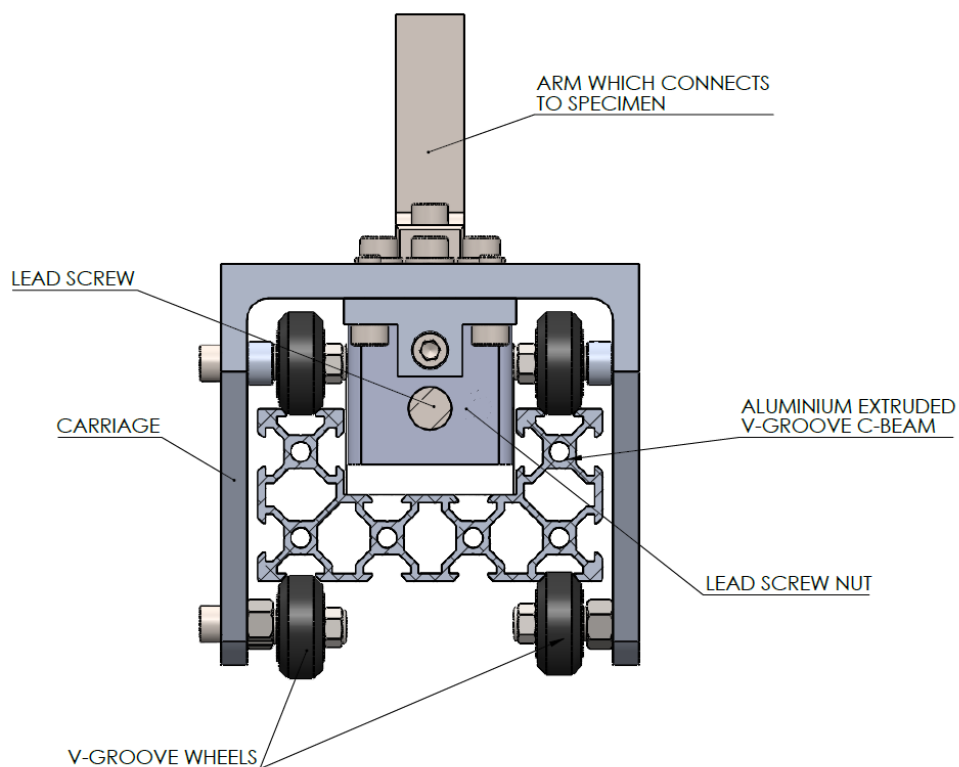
Carriage and aluminium extrusion guide, rear view
